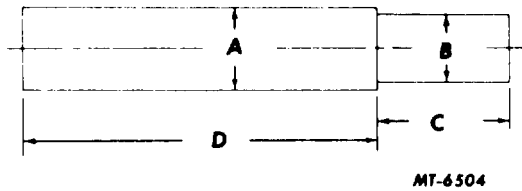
Recommended Type of Camshaft Bushing Removing Tool
